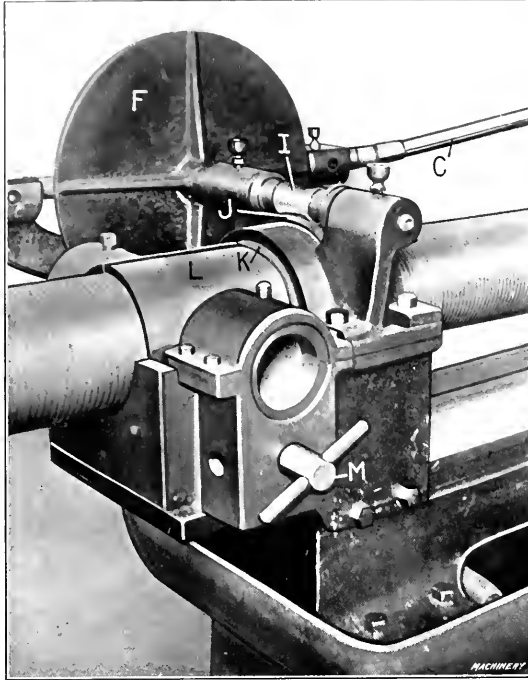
Rear View of Friction Drive for Lead-screw showing Method of Transmission
